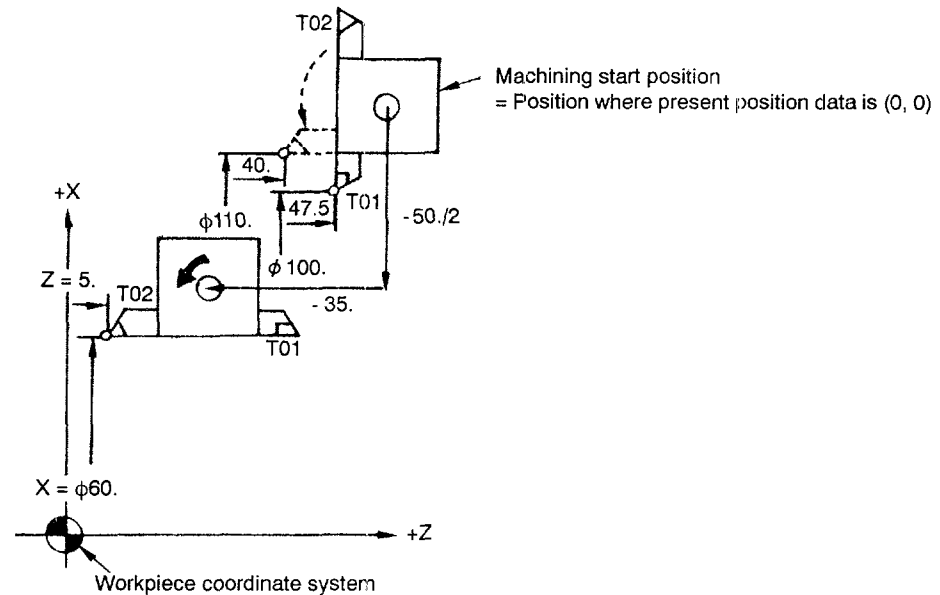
If Tool Change Positions Differ in a Workpiece Coordinate System
